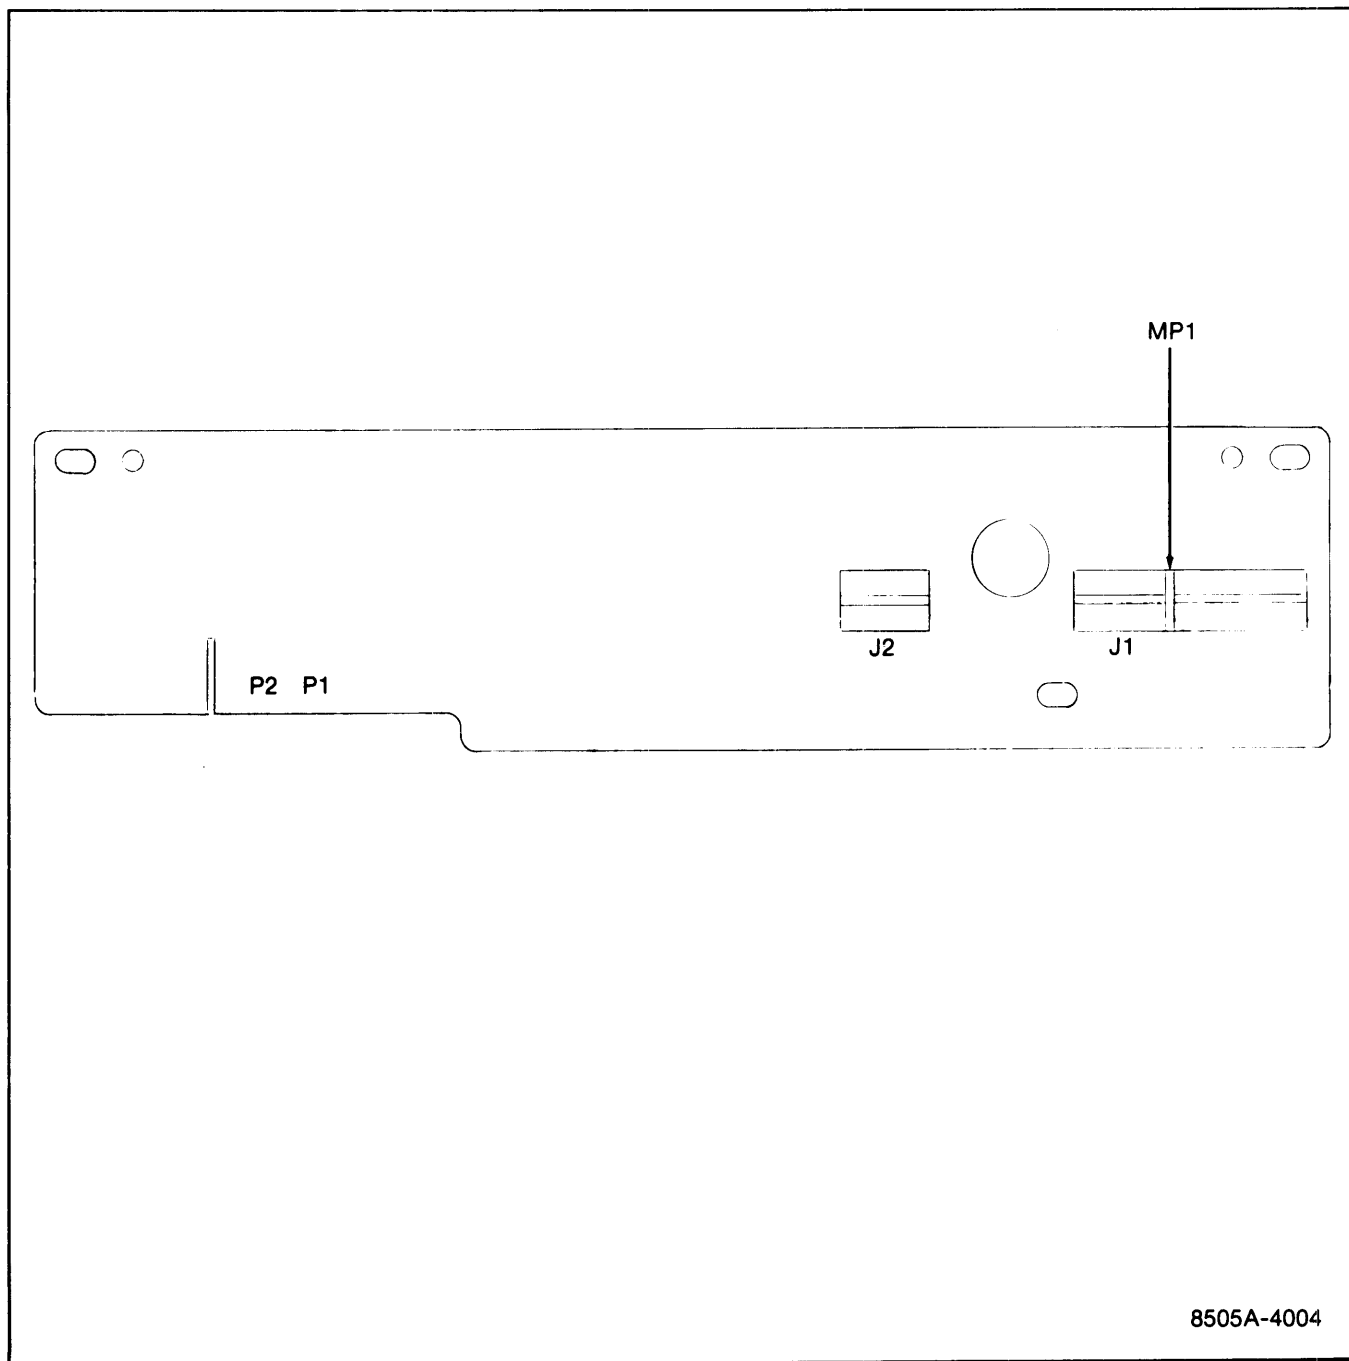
A5 Power Supply Interconnect PCB Assembly
